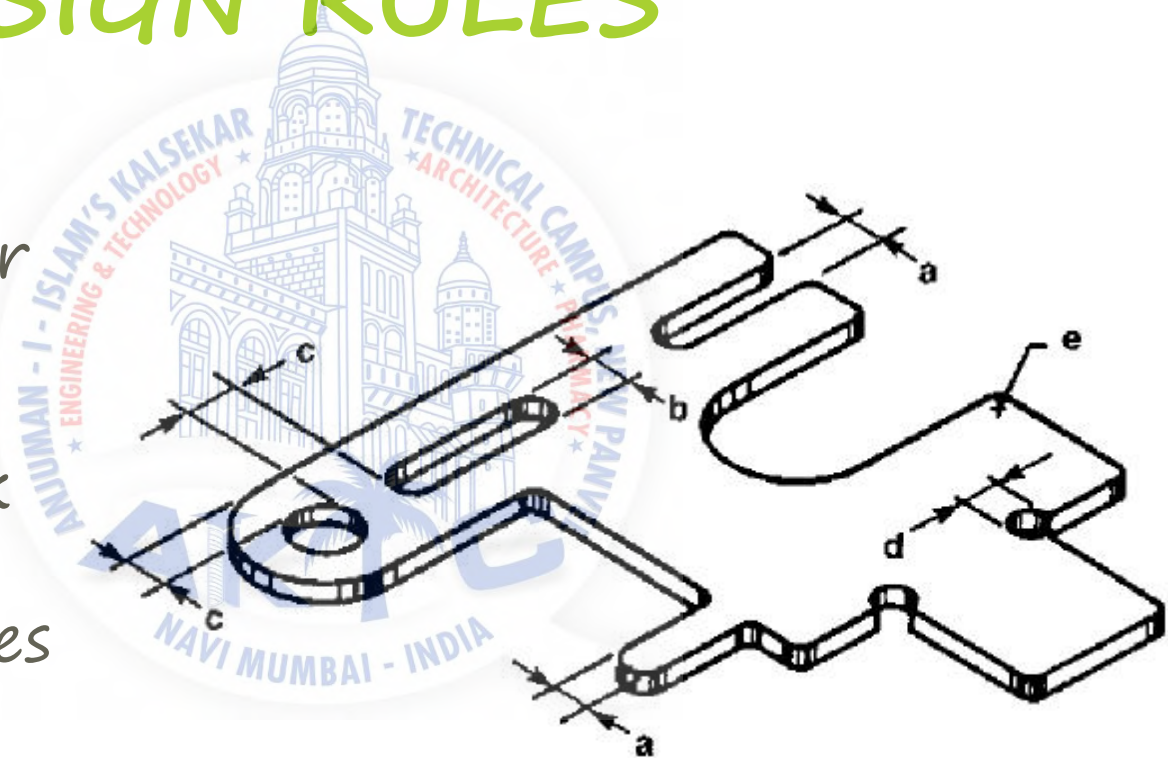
Critical dimensions in the design of a sheet metal blank.
